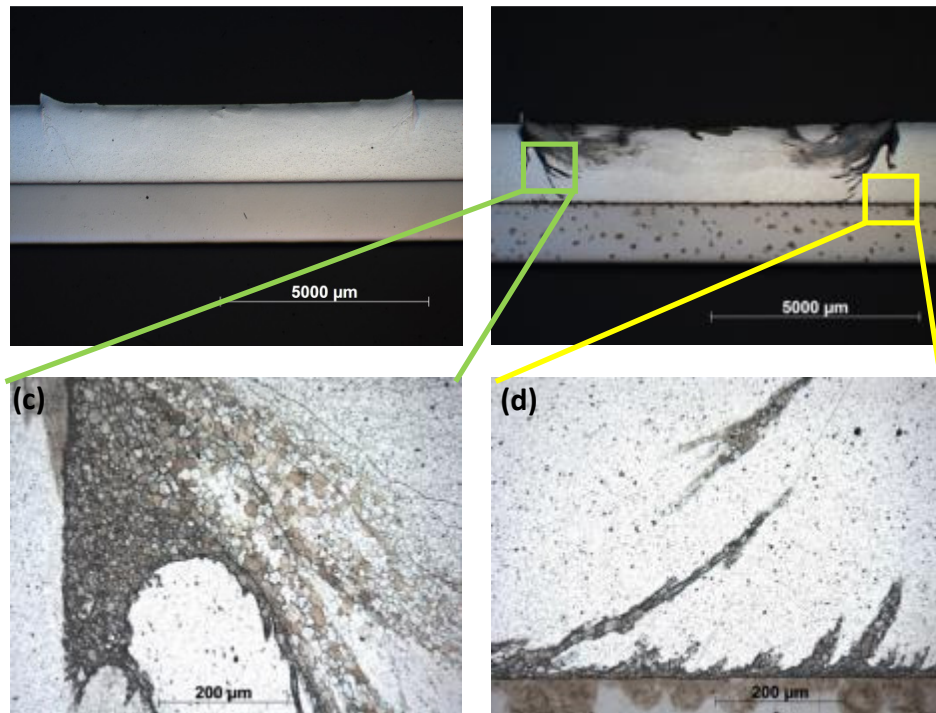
Cross section of a EN AW-5182/MS-W1200+ZE50/50 weld (specimen nr. 4.3)
